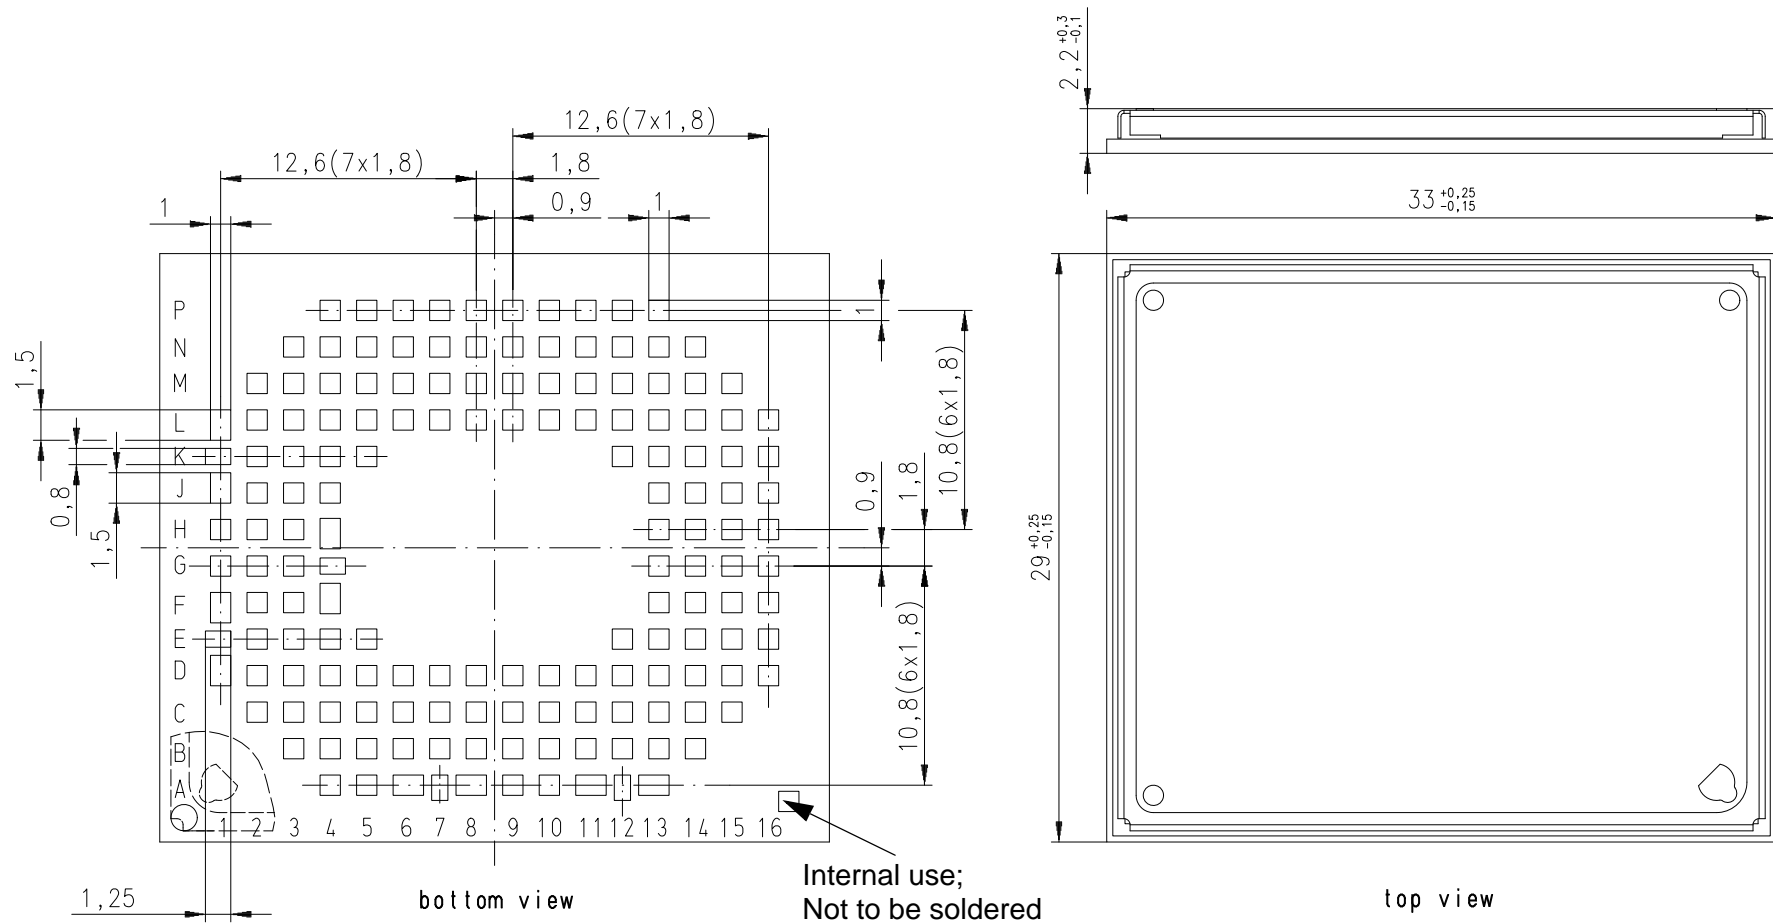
Dimensions of PLS8-E (all dimensions in mm)
